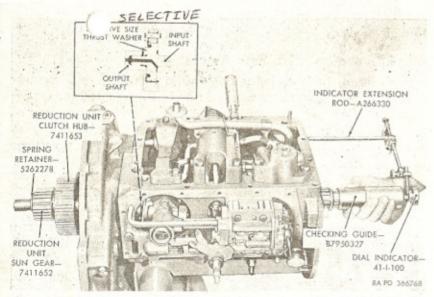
Checking input shaft end play using guide-B7950327 with indicator set and extension rod-A266330 (303M shown).
